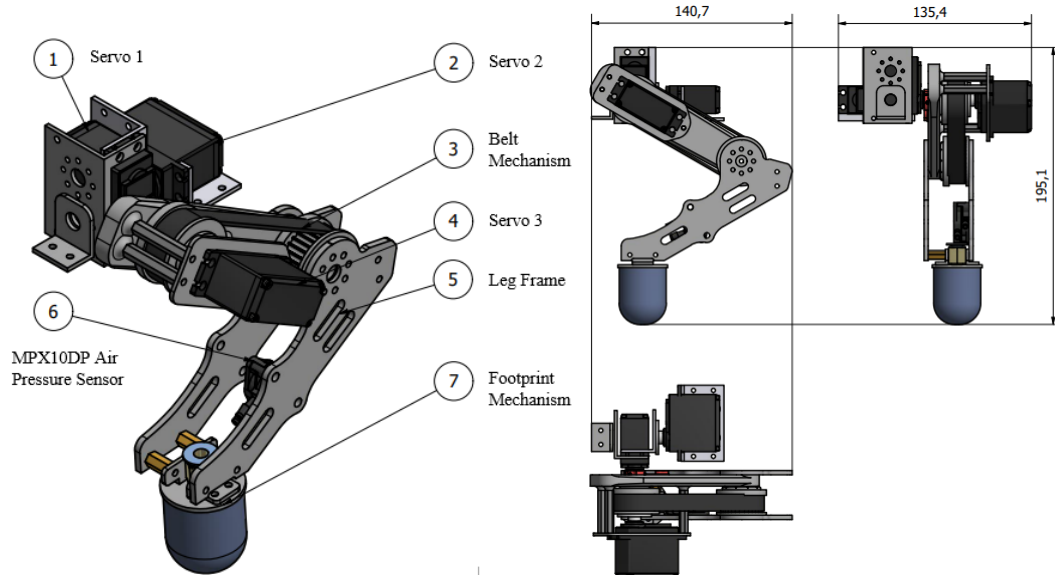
3D view of Robot Leg (a) and mechanical drawing (b)
